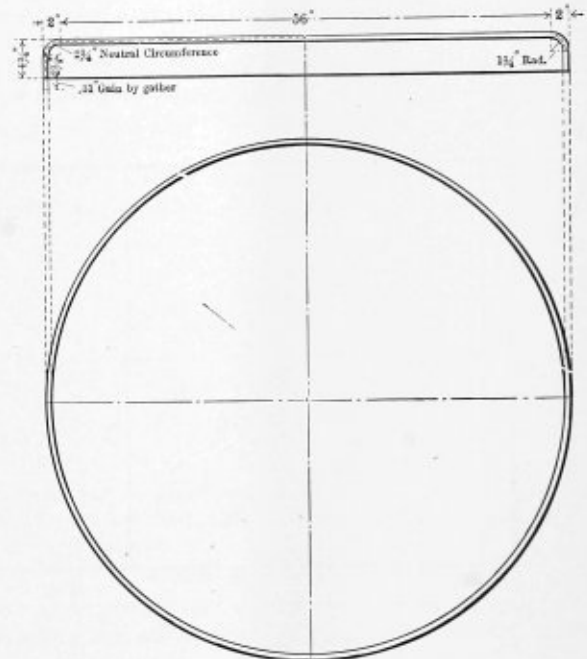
PLAN AND ELEVATION OF HEAD.
